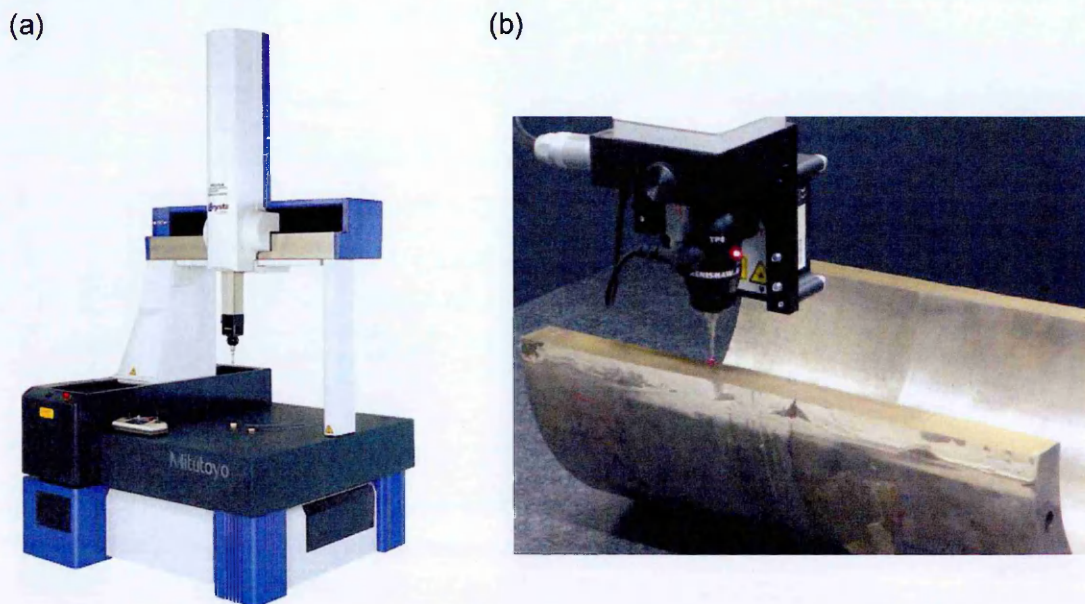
(a) Mitutoyo Crysta Plus 574 coordinate measuring machine (b) Cut pipe measured using the CMM.
